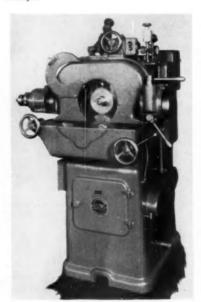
Fellows Automatic Gear Lapping Machine for Lapping External Helical Gears on a high production basis.
